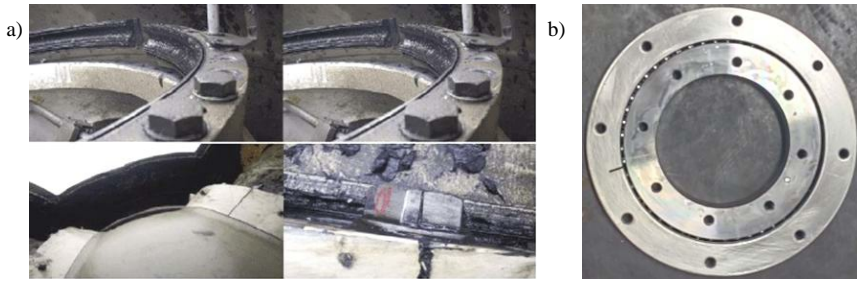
(a) Real crack fault of blade bearing; (b) Simulated crack on the outer race of the bearing being tested.
